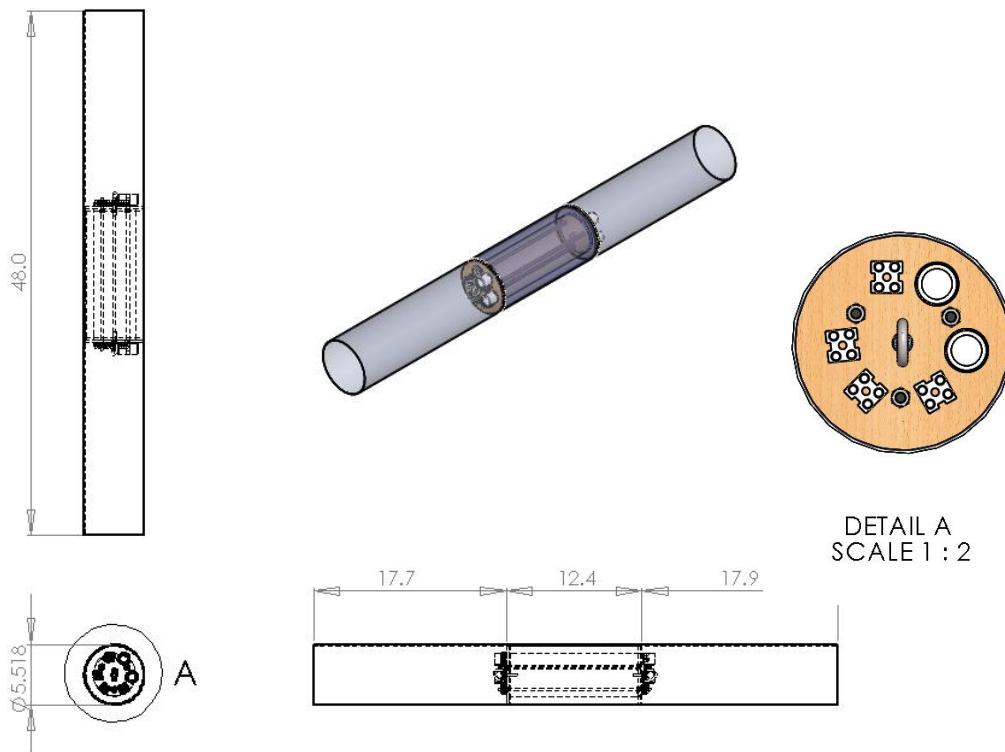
Sustainer Assembly with Avionics Bay. All dimensions are in inches.
